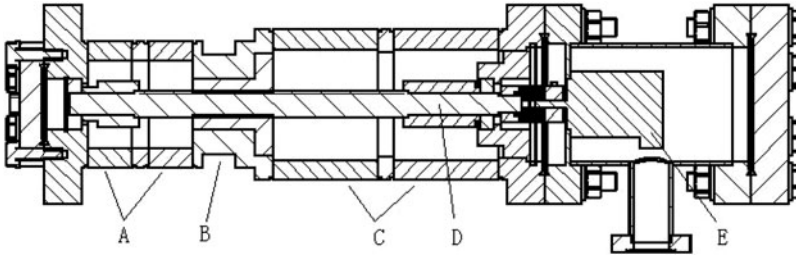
Horizontal switch driver system (A,C) bellows (B) switch holder (D) screw (E) drive motor.
